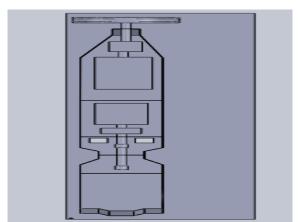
, Axle, Impeller, and machine assembly on the model (top view)
